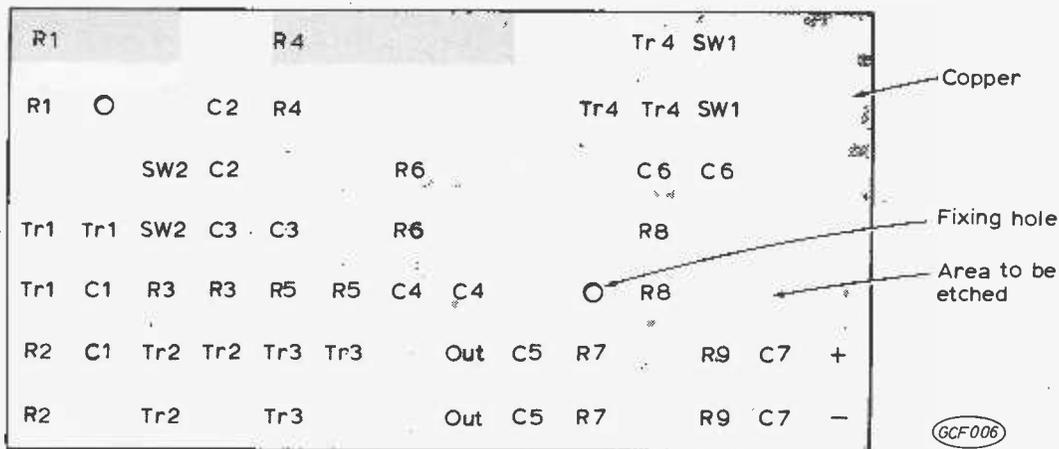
The dotted areas of Fig. 1 are transferred to the paper master as shown here, the final layout depending upon the sizes of the components to be used. The copper will be on the other side of the board, which is shown here twice final size.
